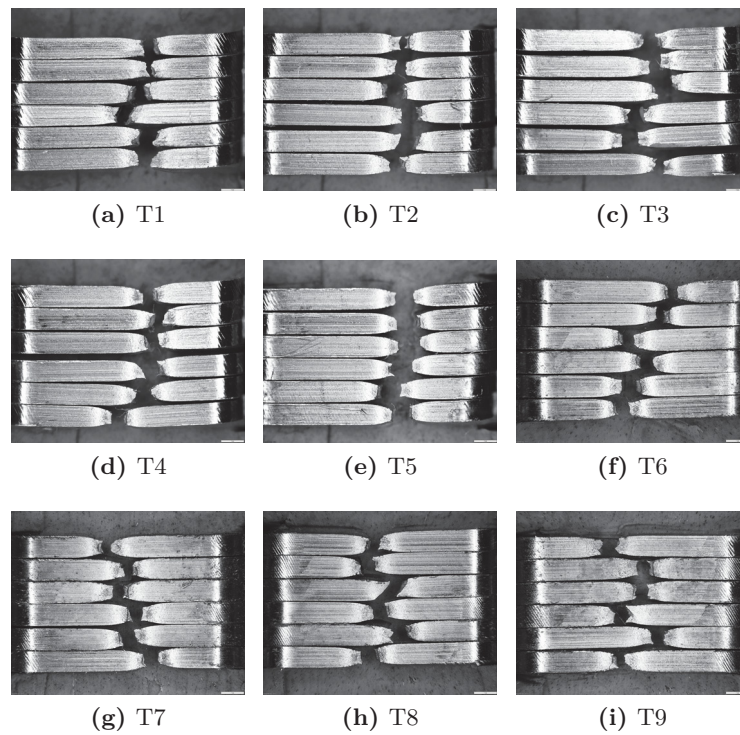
Fracture surfaces of (a) T1 to (i) T9 whereby upside is outer tube surface.
